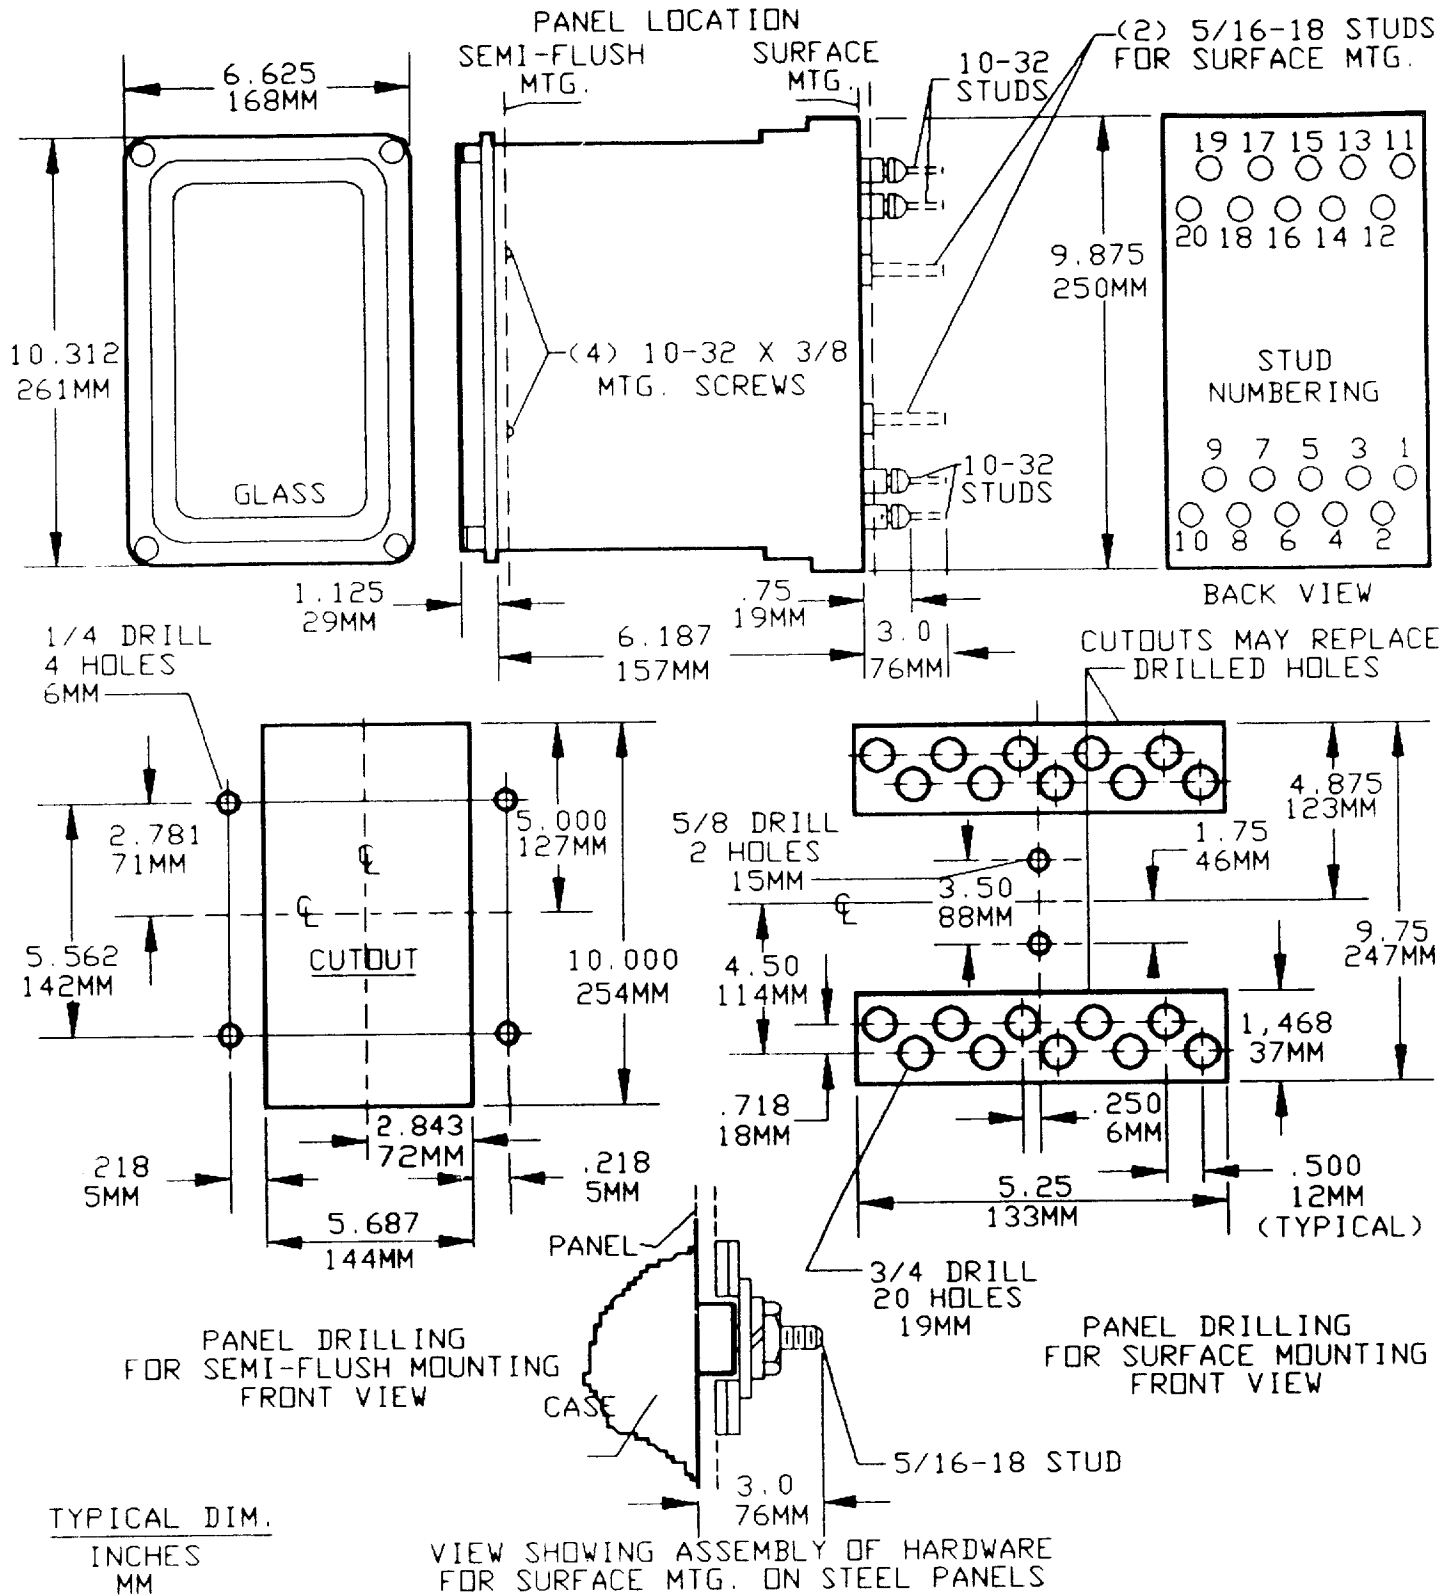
(K-6209272 [7]) Outline and Panel Drilling Dimensions for the Type SLJ21A Relay
